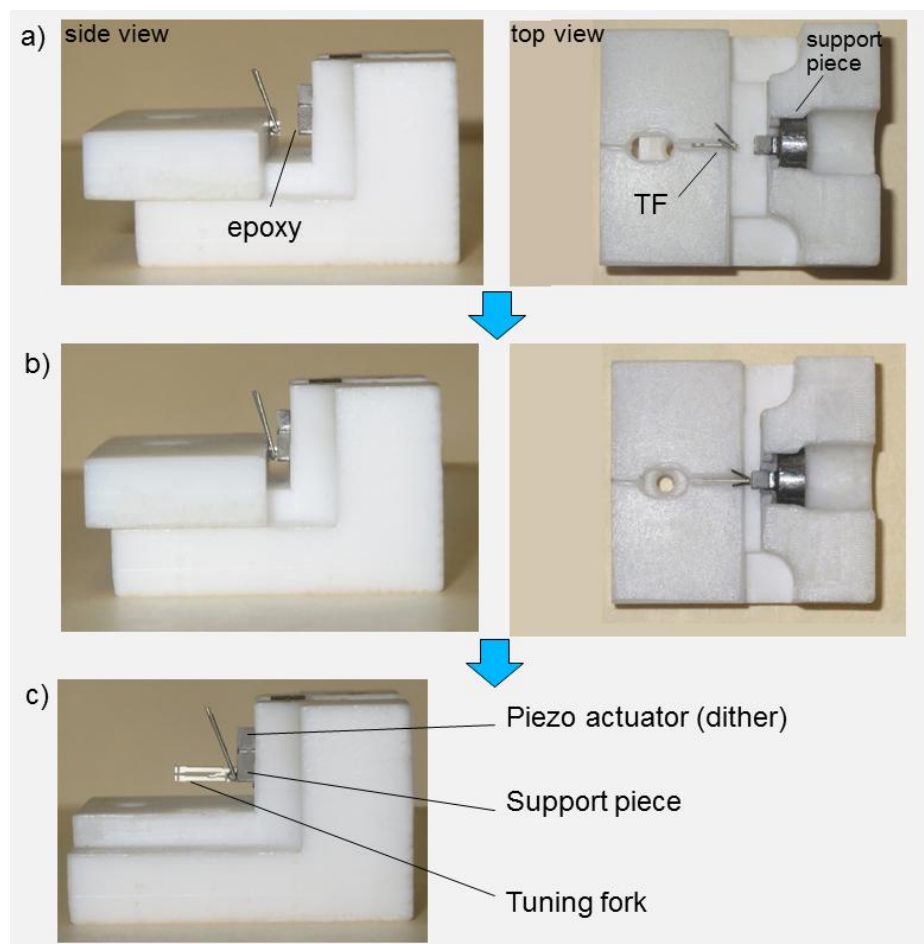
a) Side and top views of the Teflon glue fixture showing the precise alignment of the TF with the support piece. b) Curing of the TF-support piece epoxy bond. c) Side view of the glue fixture after curing of the TF-support piece bond.
